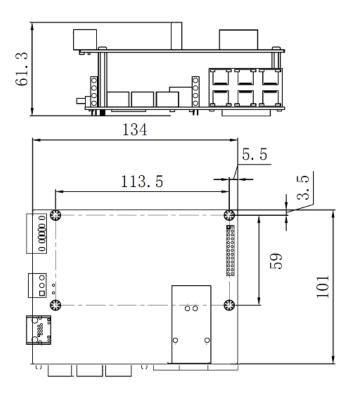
Dimensions for SICOM3000BA (bare board, 12DC/18DC)
